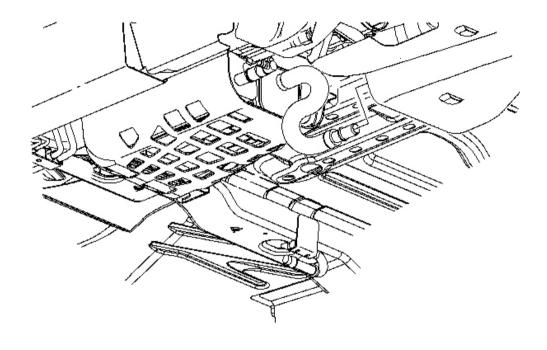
View Of EVAP Canister Fresh Air Line Courtesy of GENERAL MOTORS CORP.
